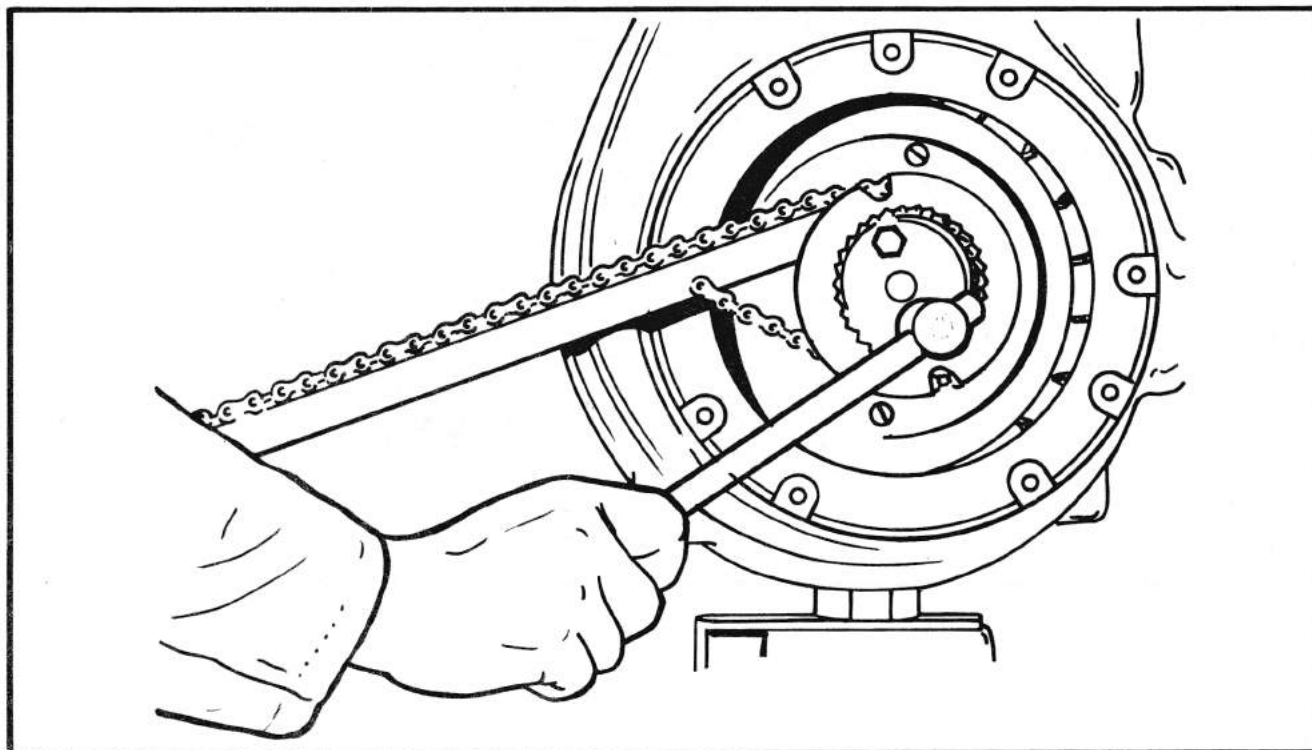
REMOVING ROPE START PULLEY USING CHAIN CLAMP TOOLS
